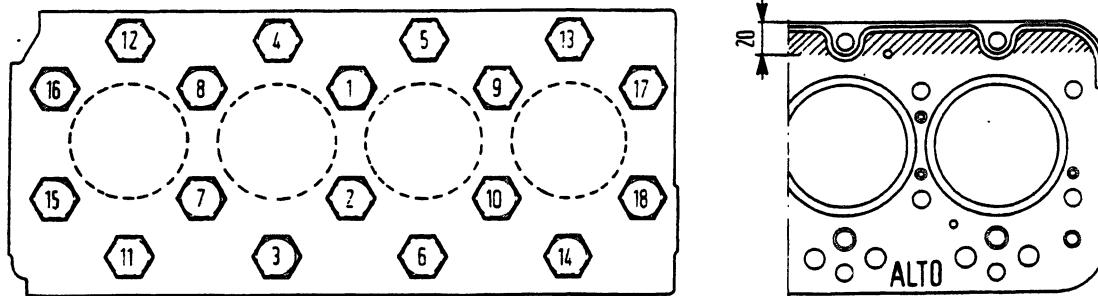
Cylinder head screws and nuts tightening sequence and detail of gasket.
